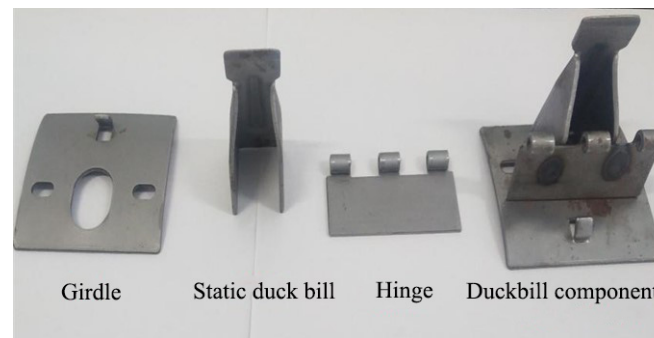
Physical drawing of the duckbill welding parts of the cotton seeder.
